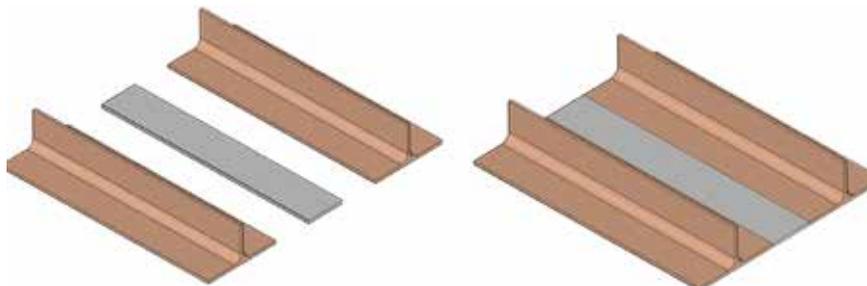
• Concept of stiffened panel construction from rolled T sections spaced apart with rolled plate (left); integrally stiffened plate demonstration piece fabricated by friction stir butt welding two rolled T sections to a steel plate.
